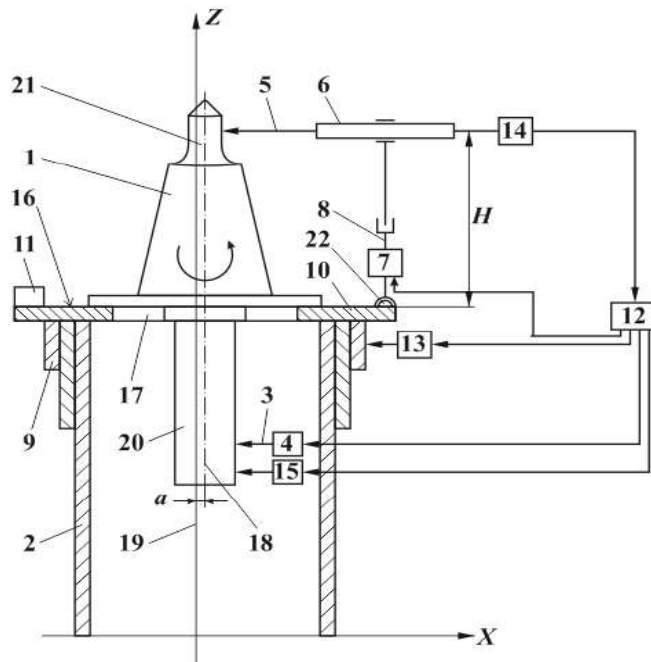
Device for measuring wear of replaceable rotary cutter inserts of milling drums
